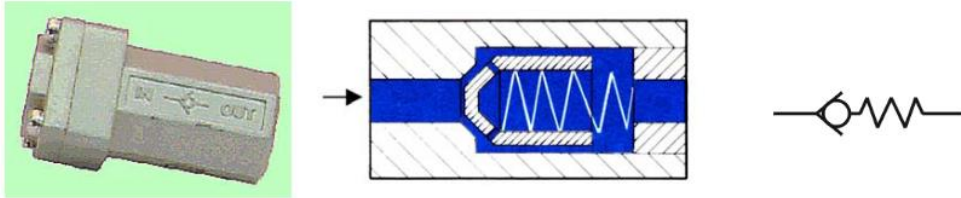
(a) Non-return valve (b) Cross section (c) Pneumatic symbol
